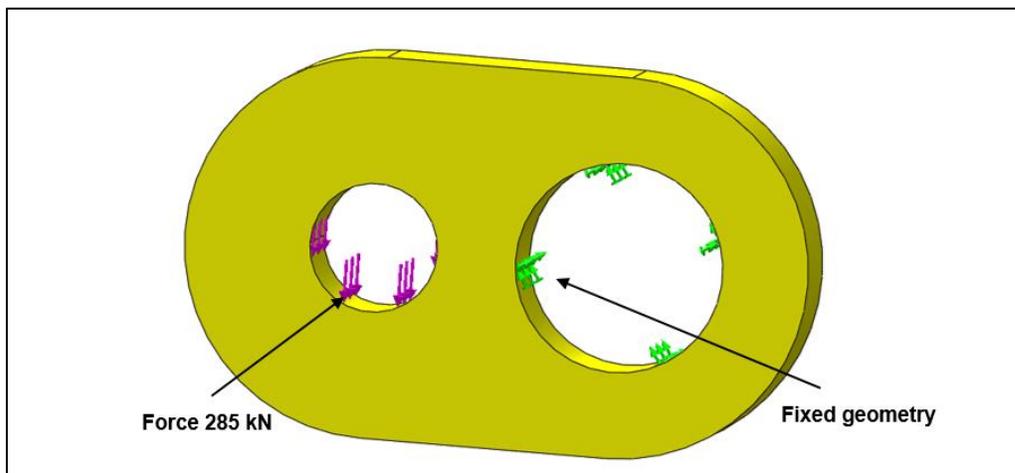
Loading and fixed of the analyzed component of the cutting head
